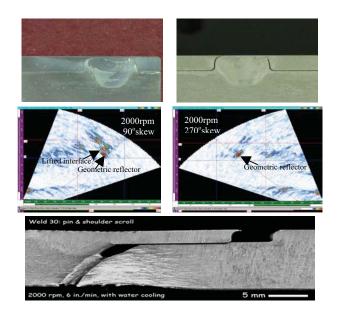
Top left: 1- to 2-minute HF etch of a cross-section from the 2000 rpm Pin and Shoulder Scroll tool FSP with cooling. Top right: 20-minute NaOH etch of a cross-secton from the 2000 rpm Pin and Shoulder Scroll tool with cooling. Center left to right: 90- and 270-degree skew PAUTs of the 2000 rpm specimen at the location near the cross-sections shown at top right. Note the Geometric Reflector and possible lifted interface in the 90-degree skew. Bottom: Tensile test of the 2000 rpm Pin and Shoulder Scroll tool FSP. Failure occurred at the adjacent weld's (2400 rpm) left-hand lifted interface and at the 2000 rpm nugget.
